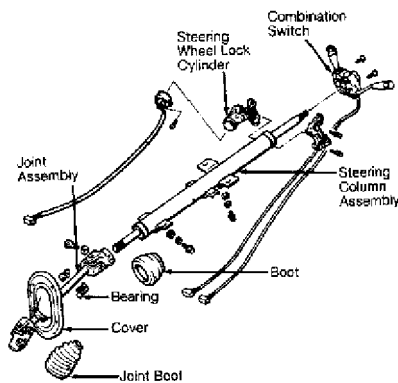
Exploded View of Steering Column Assembly (1991 Colt Vista)
